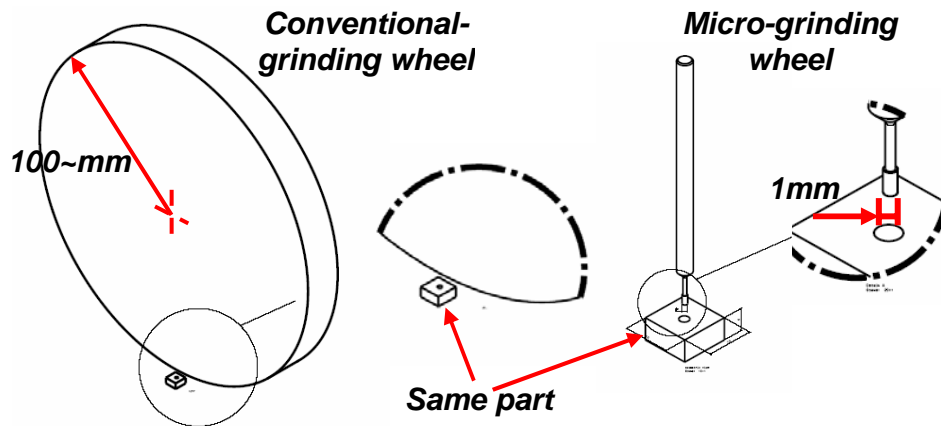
Fabrication of microscale parts using conventional and micro grinding
